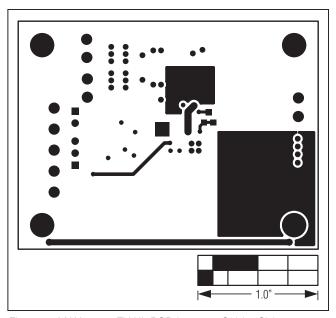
MAX16955 EV Kit PCB Layout—Solder Side
